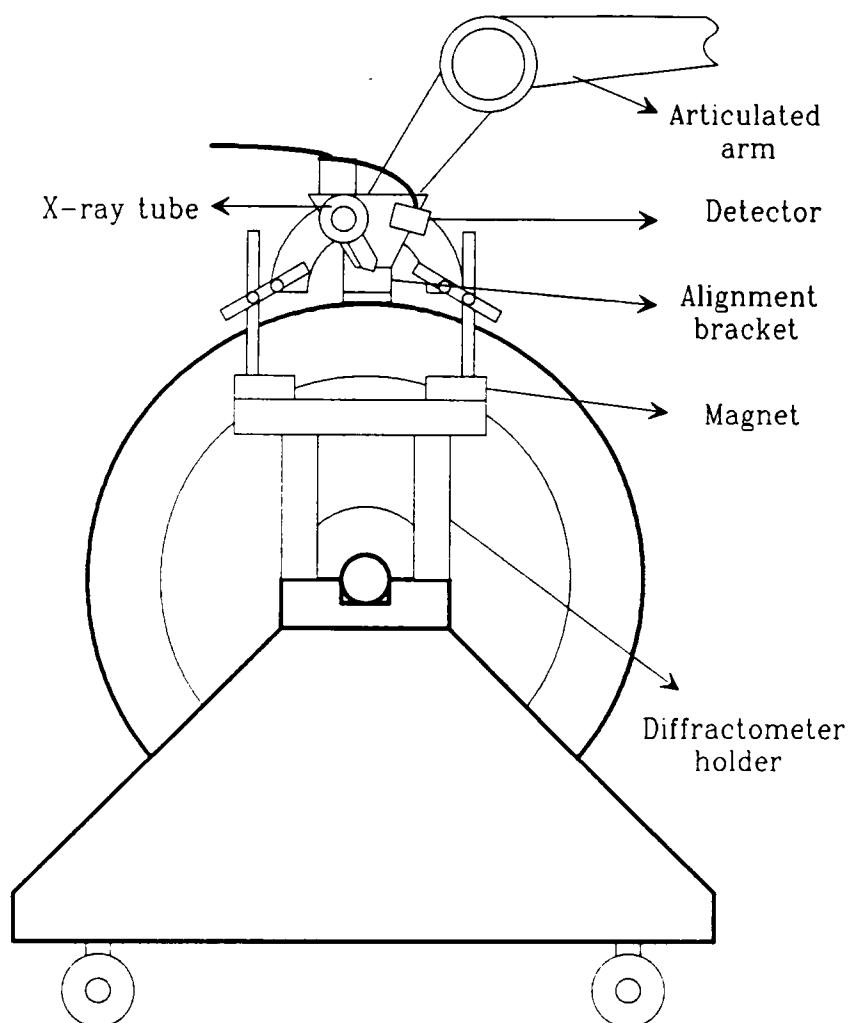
Schematic drawing of vertical wheel carrier with the x-ray diffractometer mounted.
